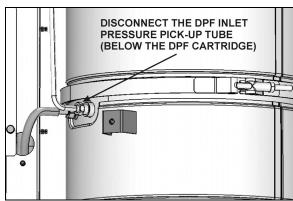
DISCONNECTING THE LOWER PRESSURE PICK-UP TUBE (VOLVO D13 ONLY) 04025
